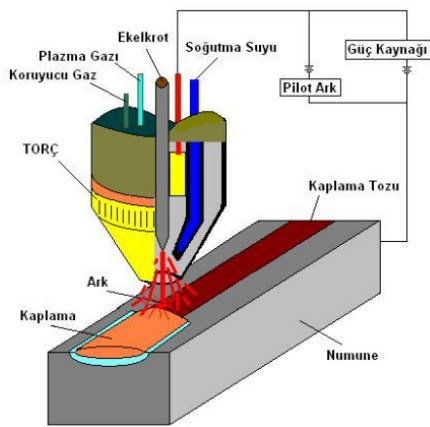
Schematic illustration of the coating method with PTA welding [25].
